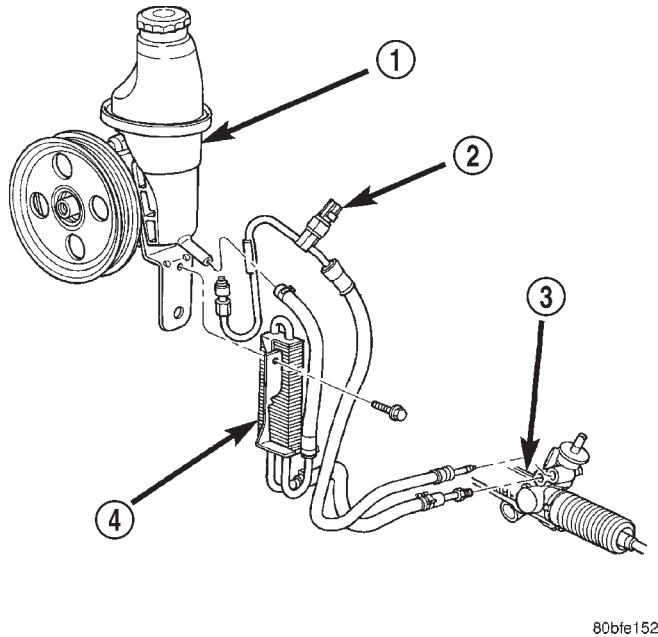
Power Steering Pump Pressure Switch—4.7L V-8 Engine
